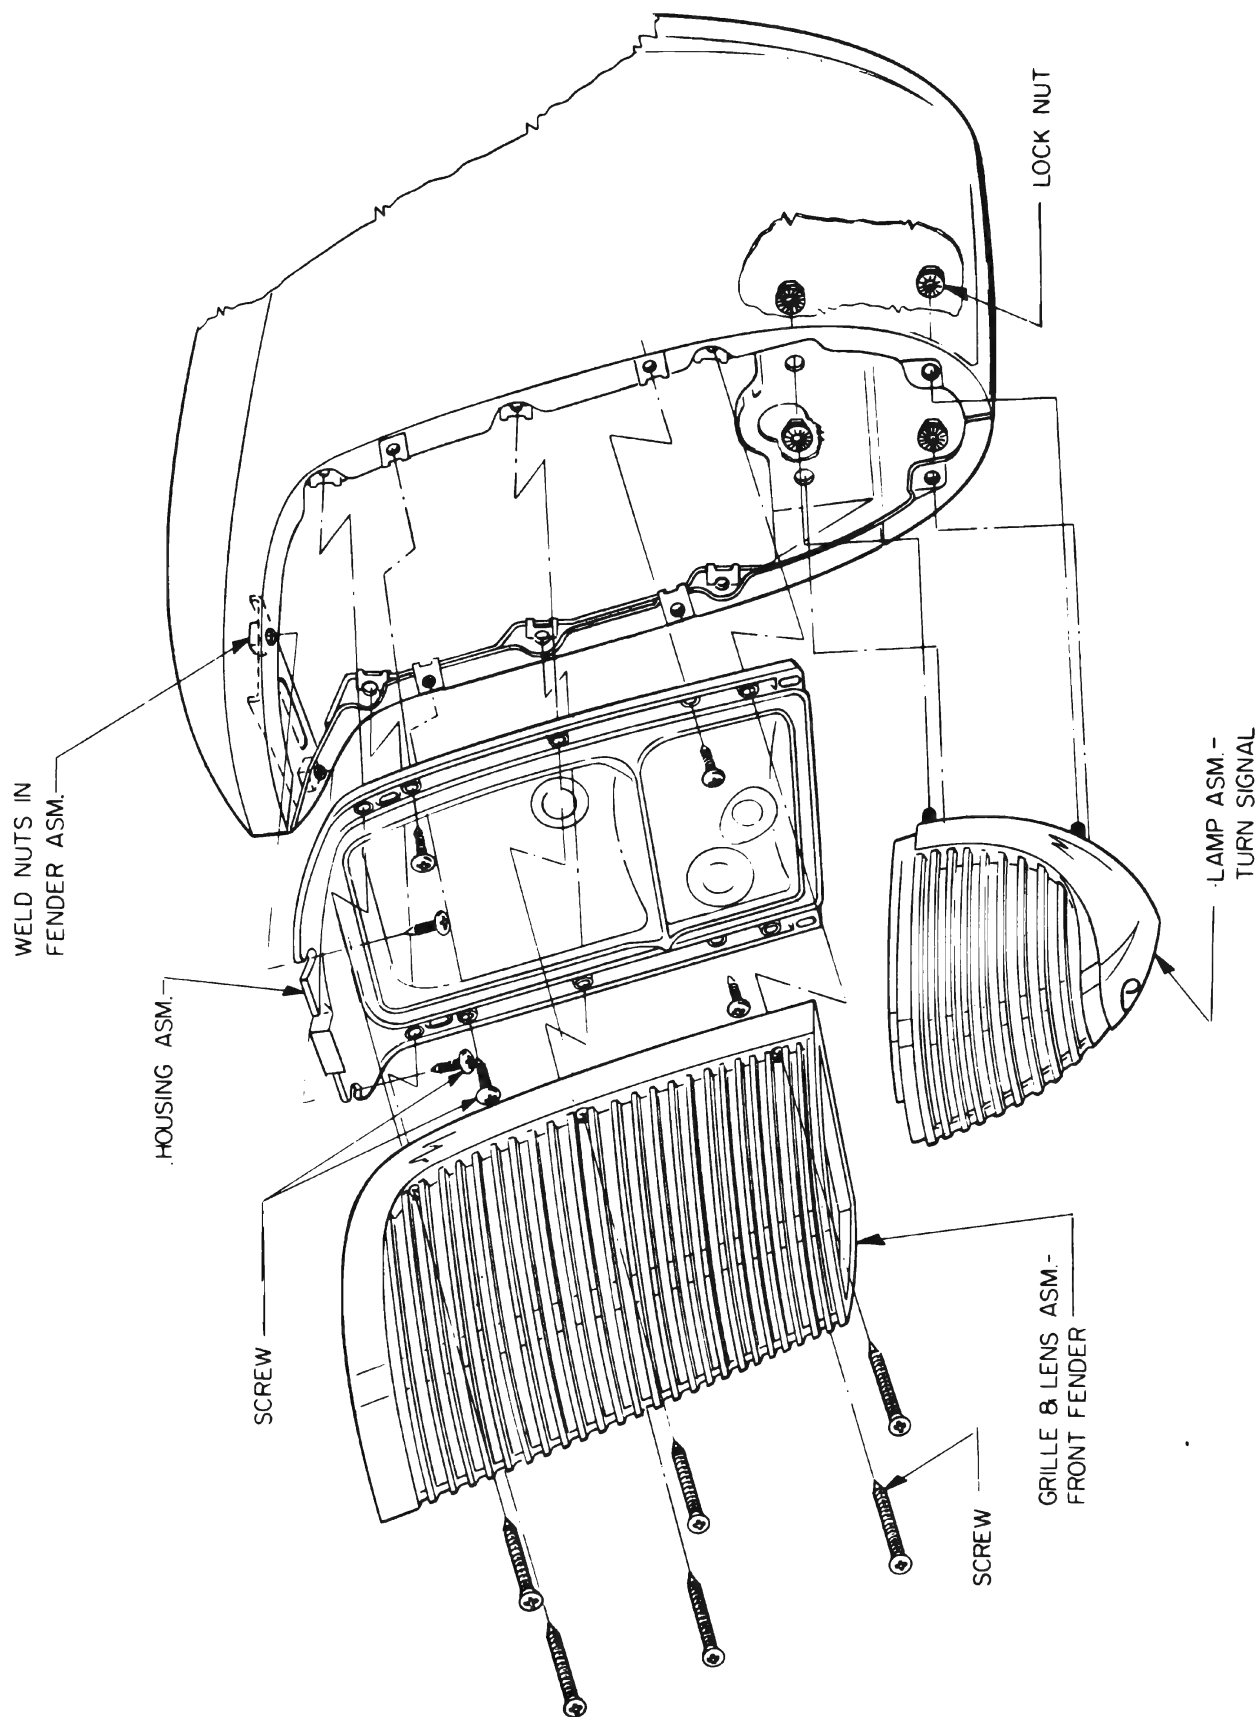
Parking Lamp, Cornering Lamp, Directional Signal & Grille Assembly—4700 Series
